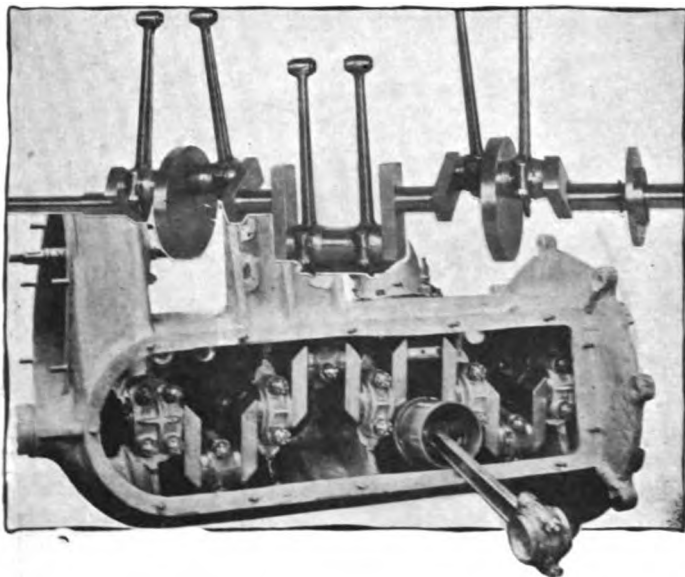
Six-cylinder crankshaft in use on the Talbot cars and the 15-horsepower Crossley crankcase
